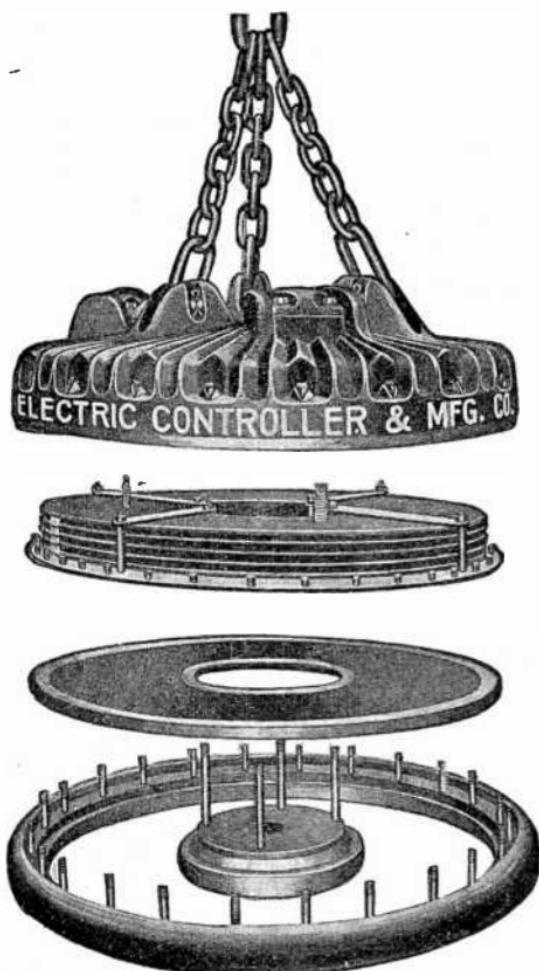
,952.—Electric Controller lifting magnet; sectional view showing construction.
